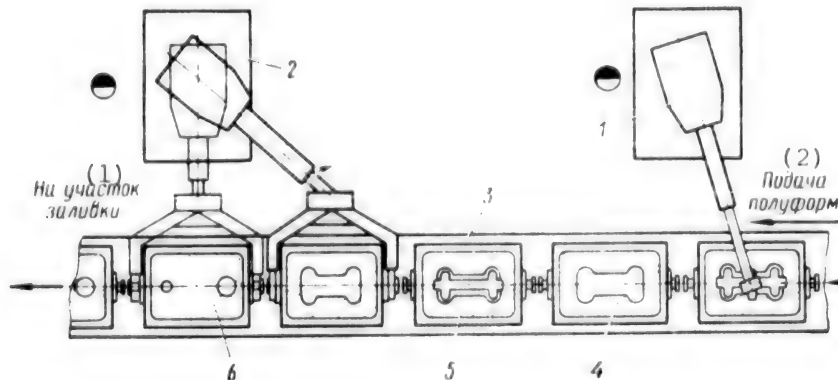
Robotized Core Placing and Mold Assembly Complex
